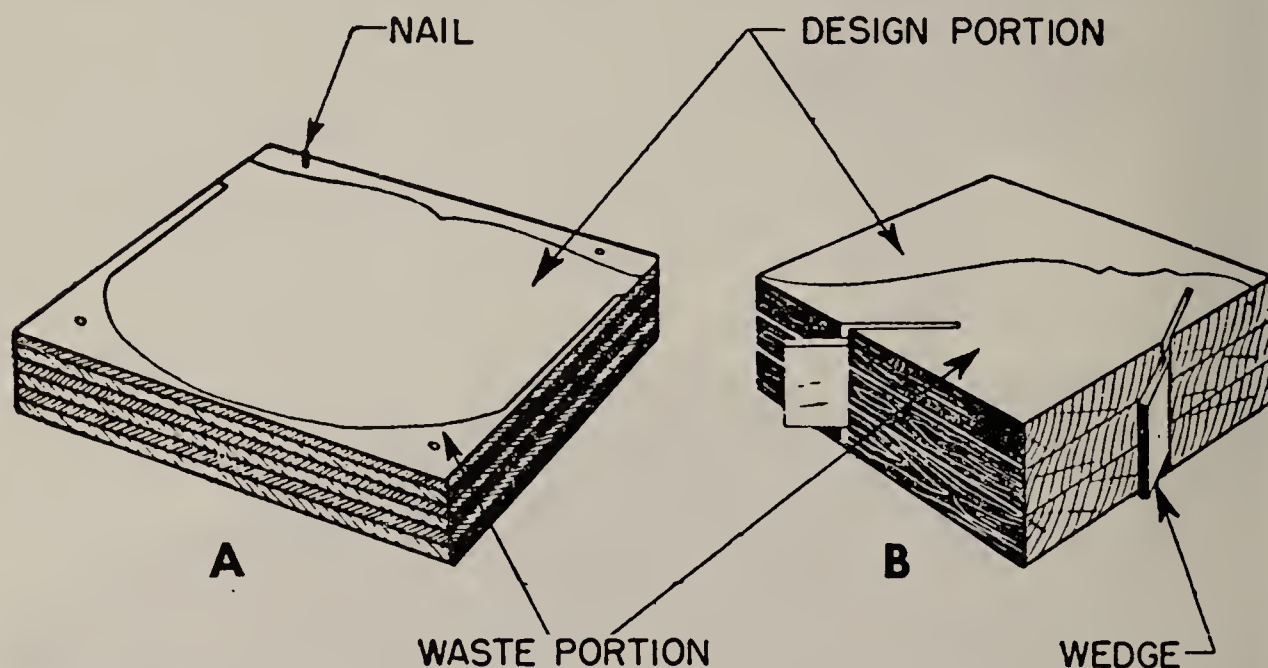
Method of assembly in multiple-sawing operations. (A) Nails are driven into the waste portions of the design to hold the parts together while being sawed. (B) Multiple-sawing operations with stock wedged together.
